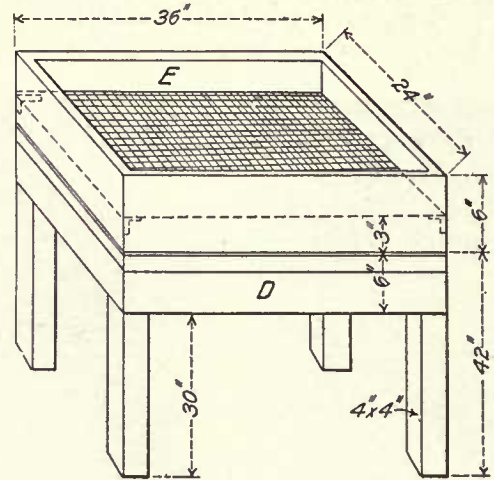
Table for Cleaning Journal Box Packing From Which the Oil Has Been Removed.
